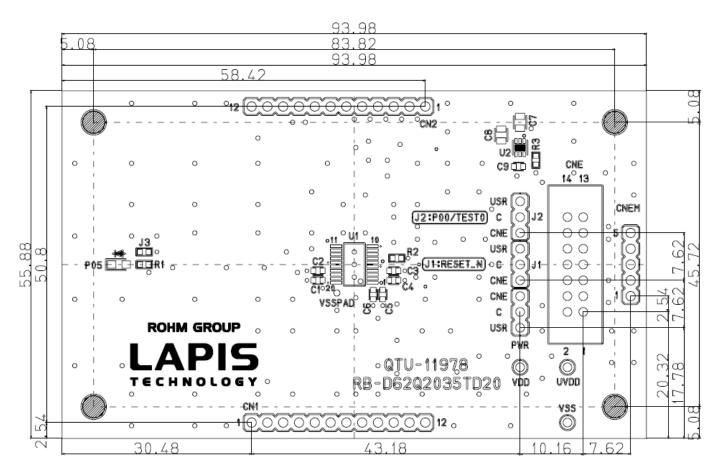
PCB dimensional outline diagram and layout of components (Top view)
